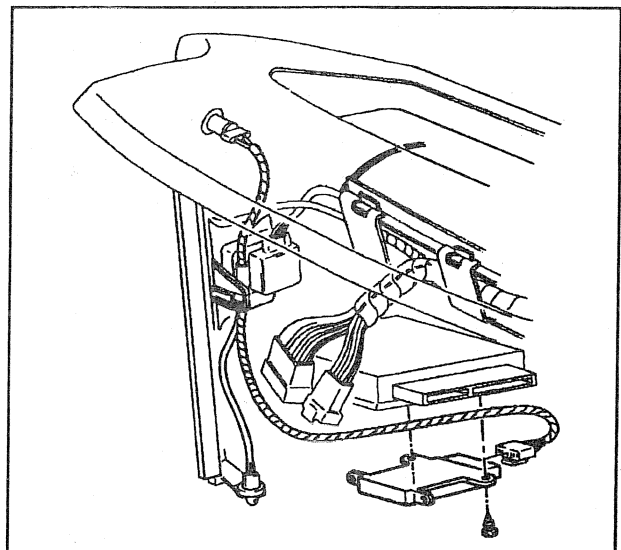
Vehicle Speed Sensor Calibrator Module Replacement
